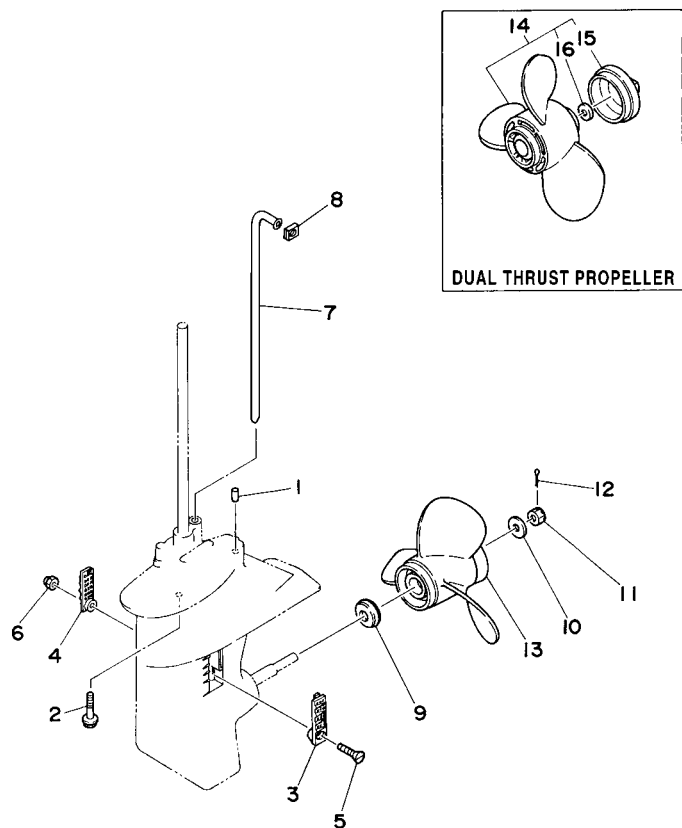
LOWER CASING & DRIVE 1 CARCACA INF. E TRANSMISSAO 1
